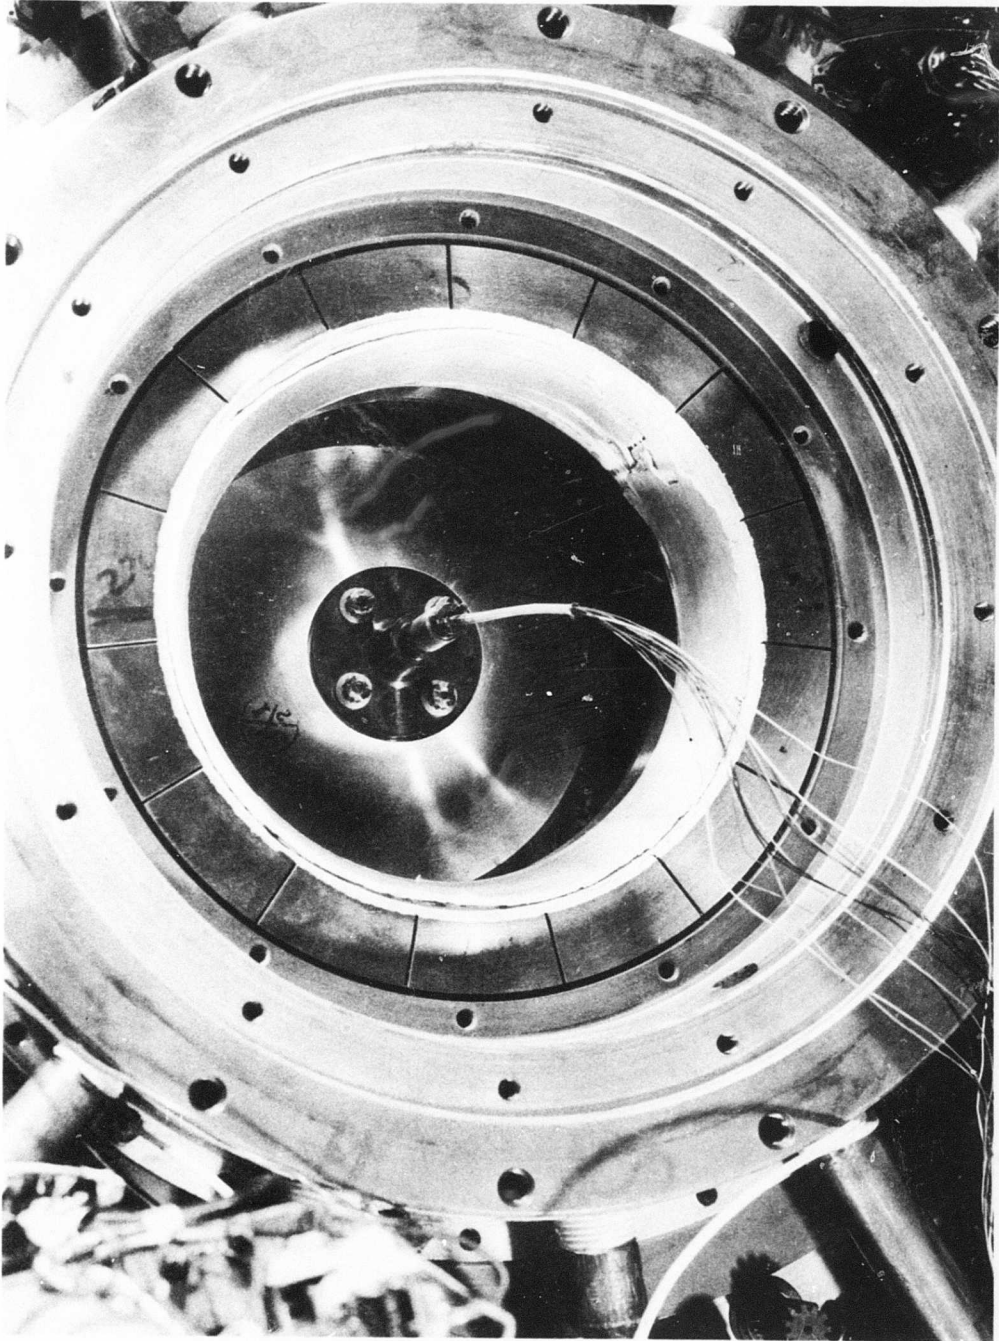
View of Fractured Aluminum Ring Attached to Counterweight Area of Rotating Shroud.
